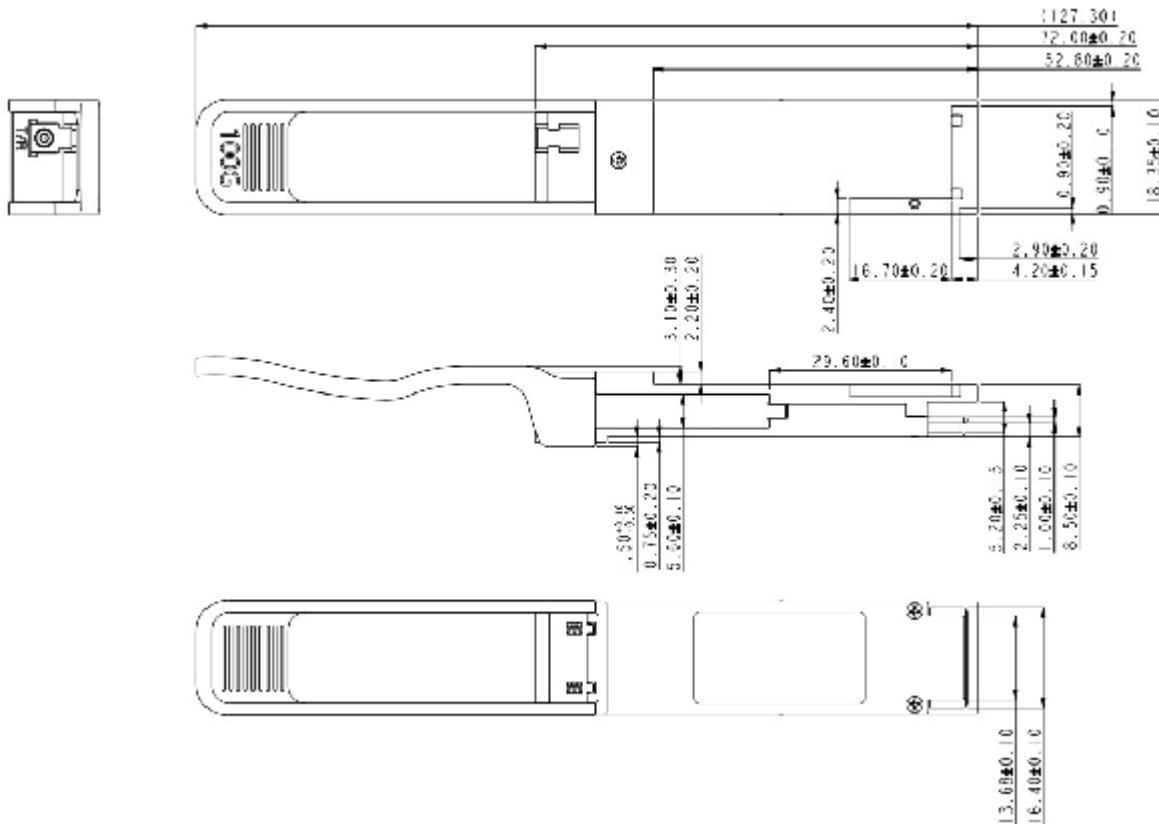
100G ER1 BIDI QSFP28 Mechanical Dimensions
